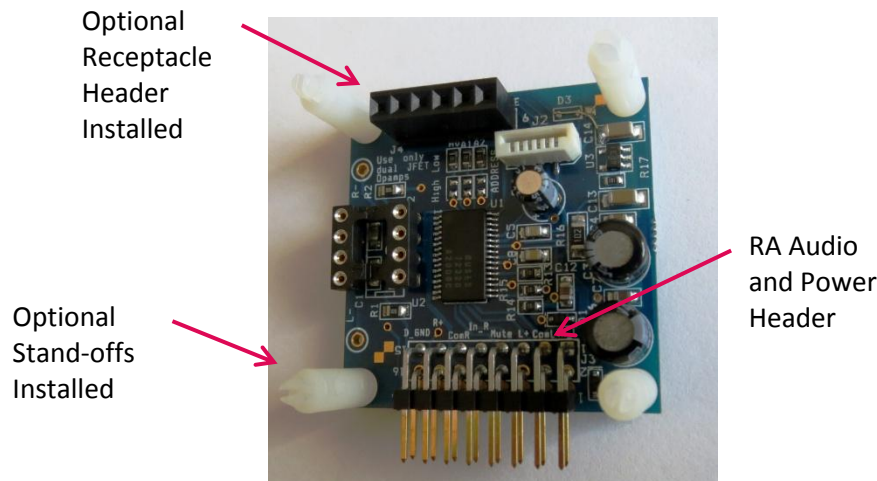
VCM Board with Optional Connectors and Stand-offs Installed.
